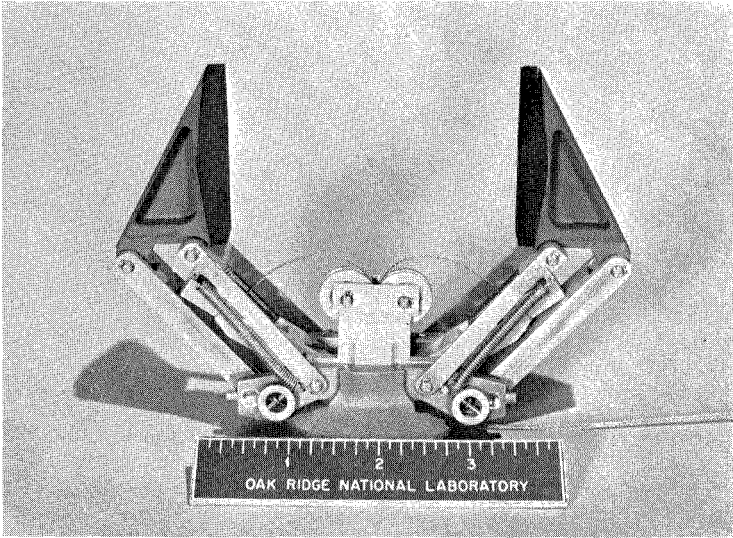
Master Slave Manipulator tong and inner-finger assembly.
